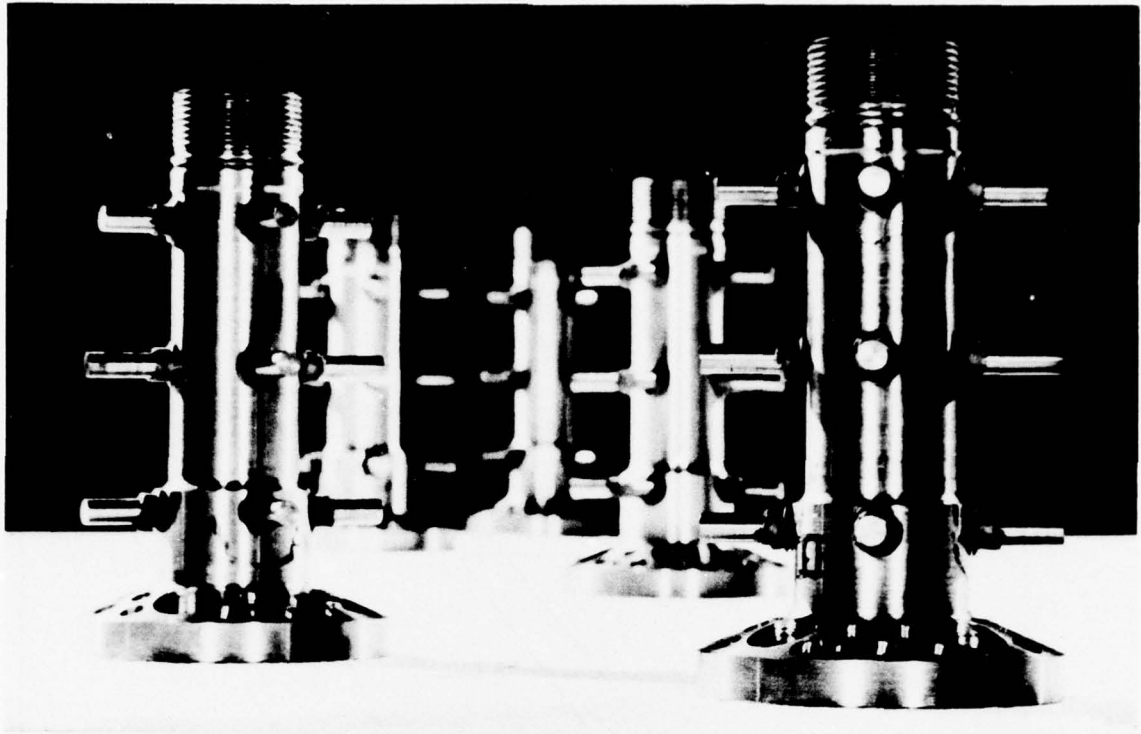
High-precision component manufactured by friction welding. The twelve projecting studs have to be spaced with great precision both axially and circumferentially and there are narrow tolerances for the finished length.
